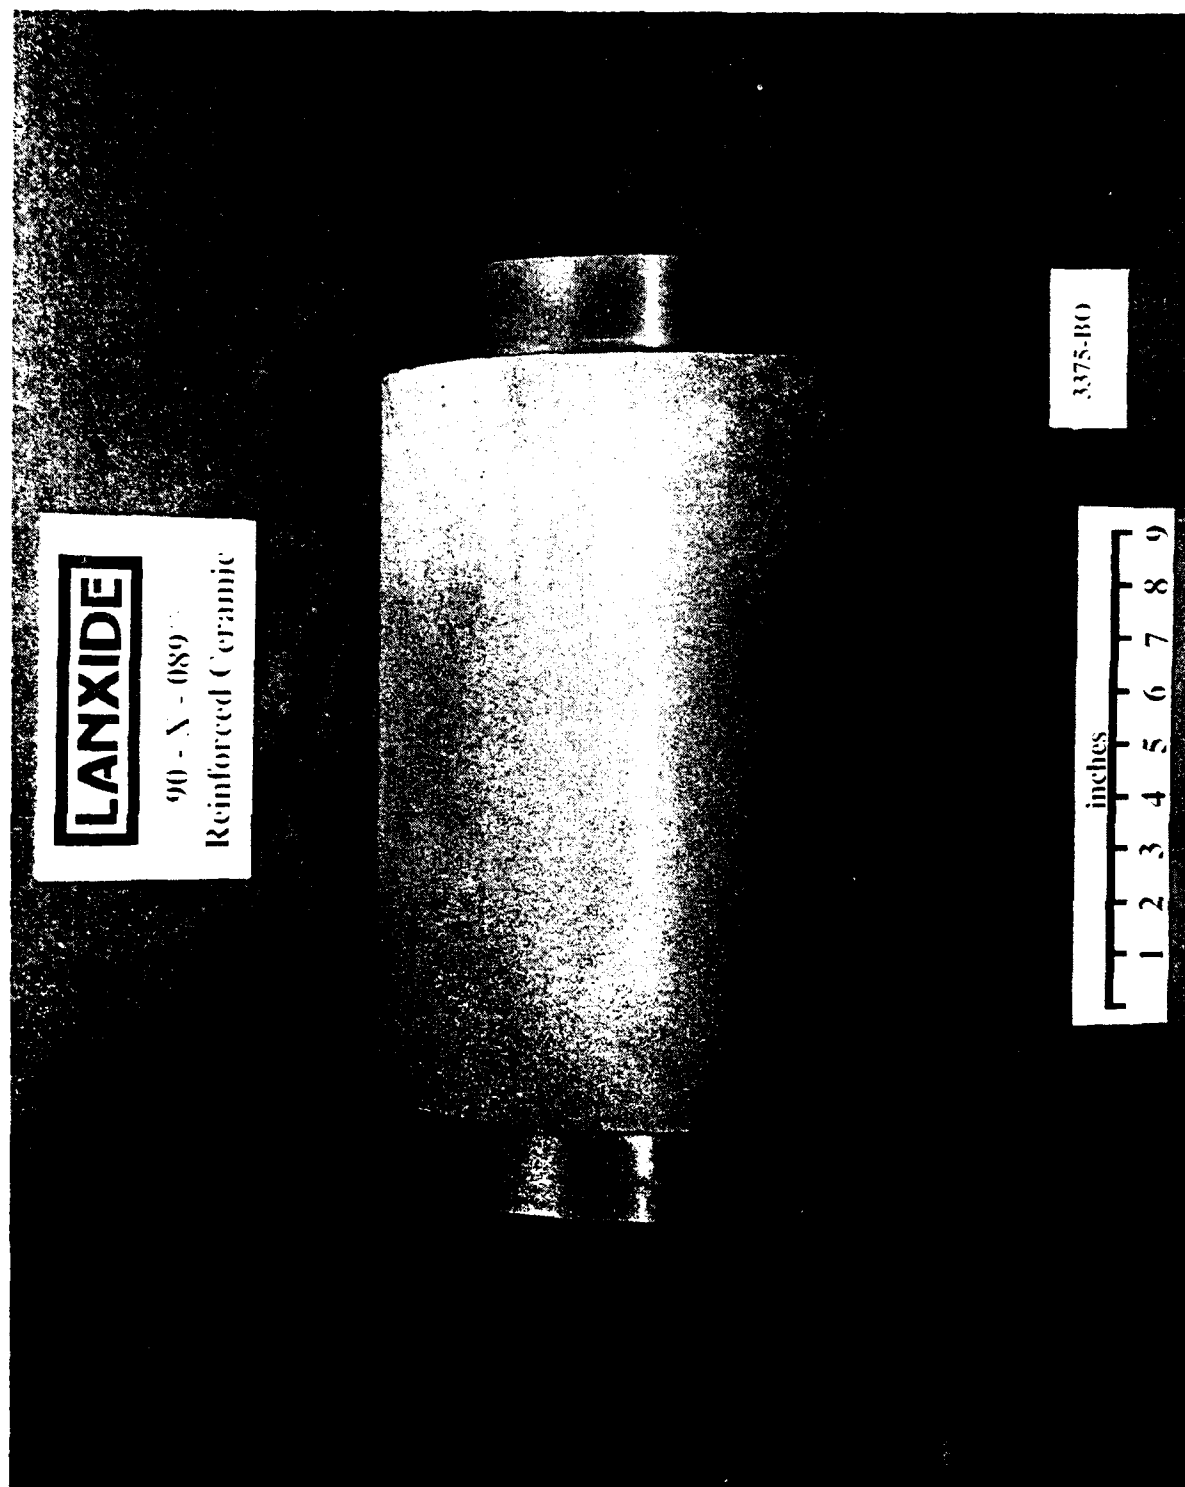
"As-cast" cylinder. Only the ends and the bearing surfaces of this cylinder have been machined.
